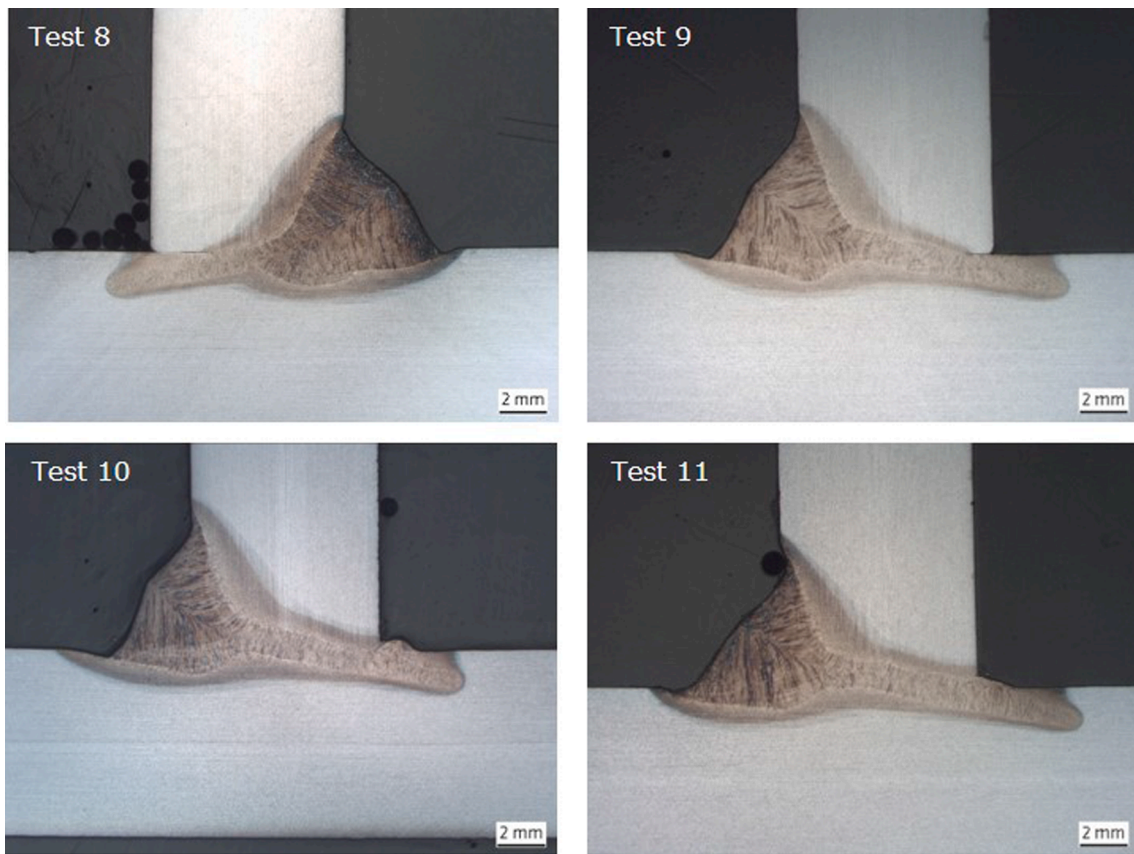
Macrographic images of cross-sections of HLAW welds obtained from Tests 8–11.
